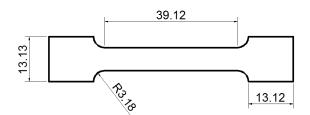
Dimension (mm) of Tensile Bar Cavity with Thickness of 3.17mm
